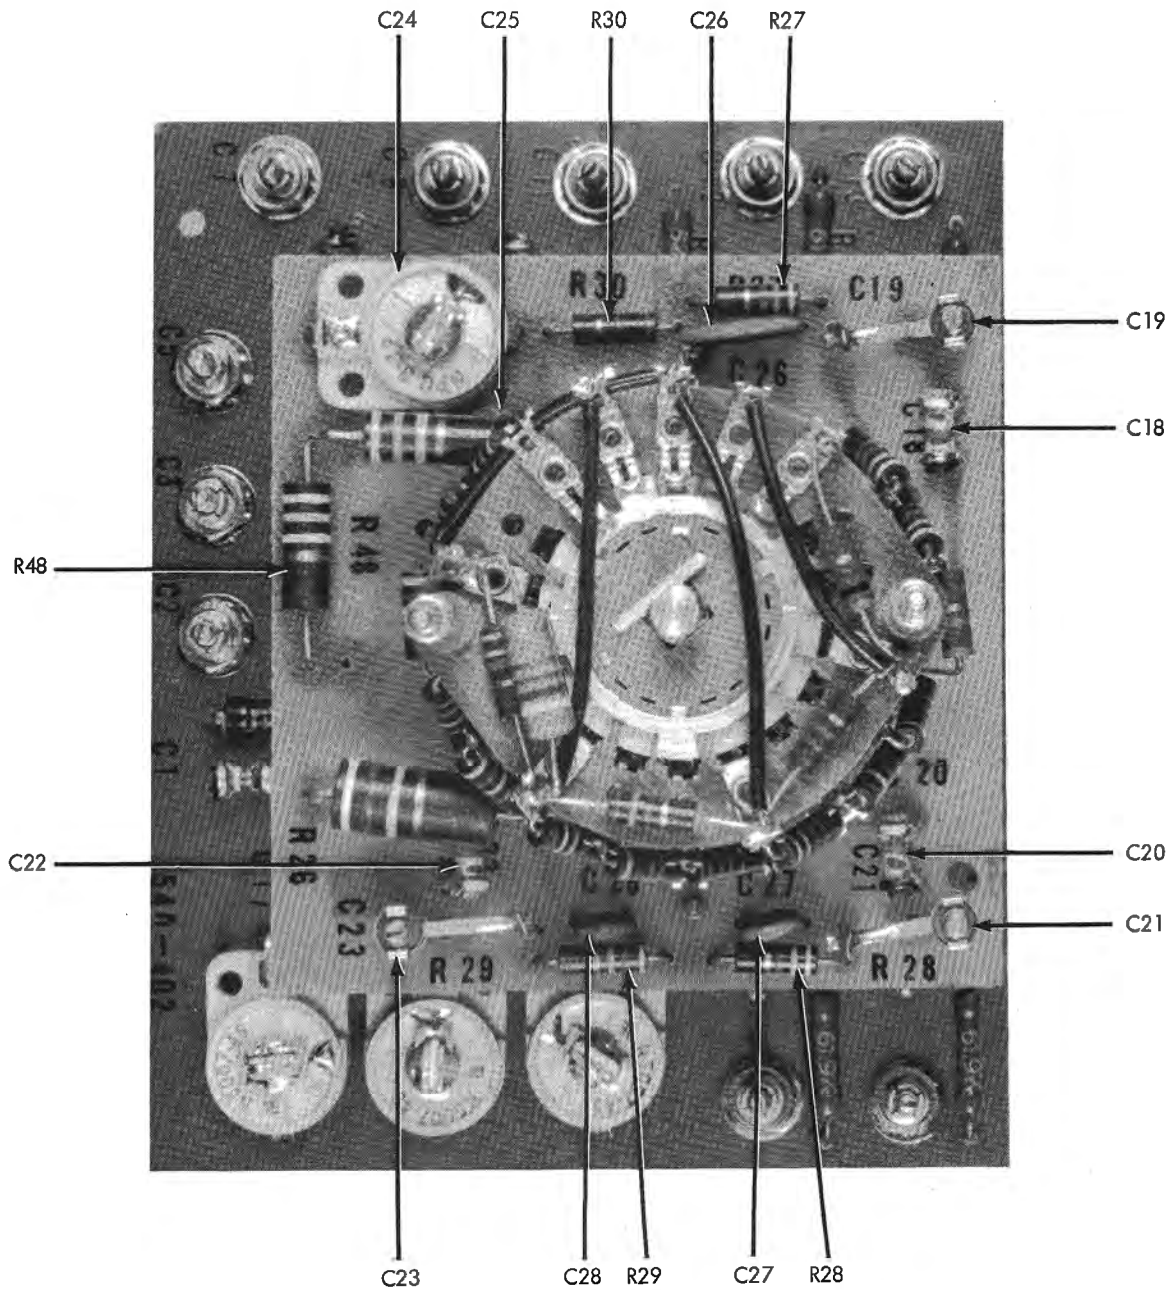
A. AC INPUT SEARCH BOARD ASSEMBLY
